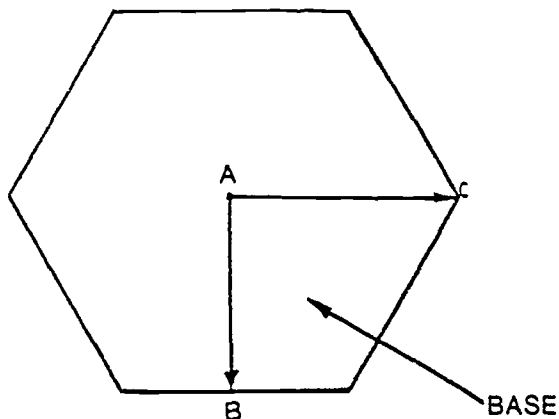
PROTRUSION TEST GAUGE FOR SUSPENDED SWING ASSEMBLIES
